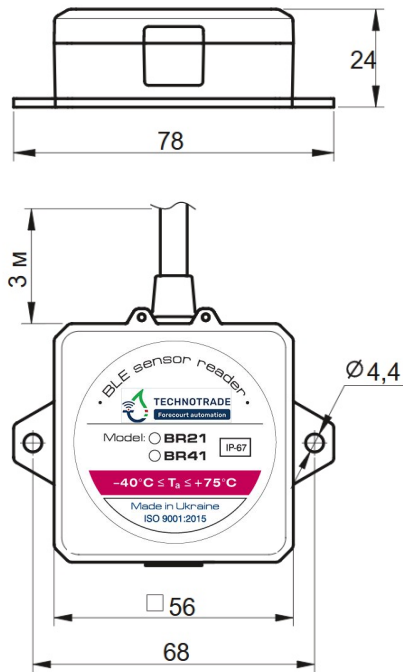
Dimensional drawing and connection dimensions of the Reader BR21/BR41 models
